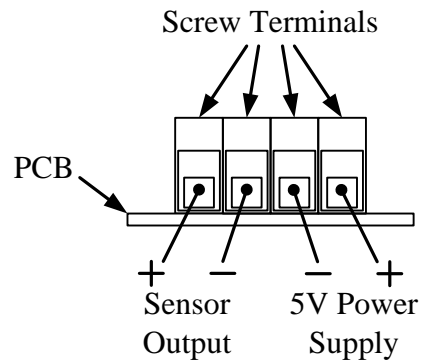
Pressure Sensor Circuit Board Terminal Connections
